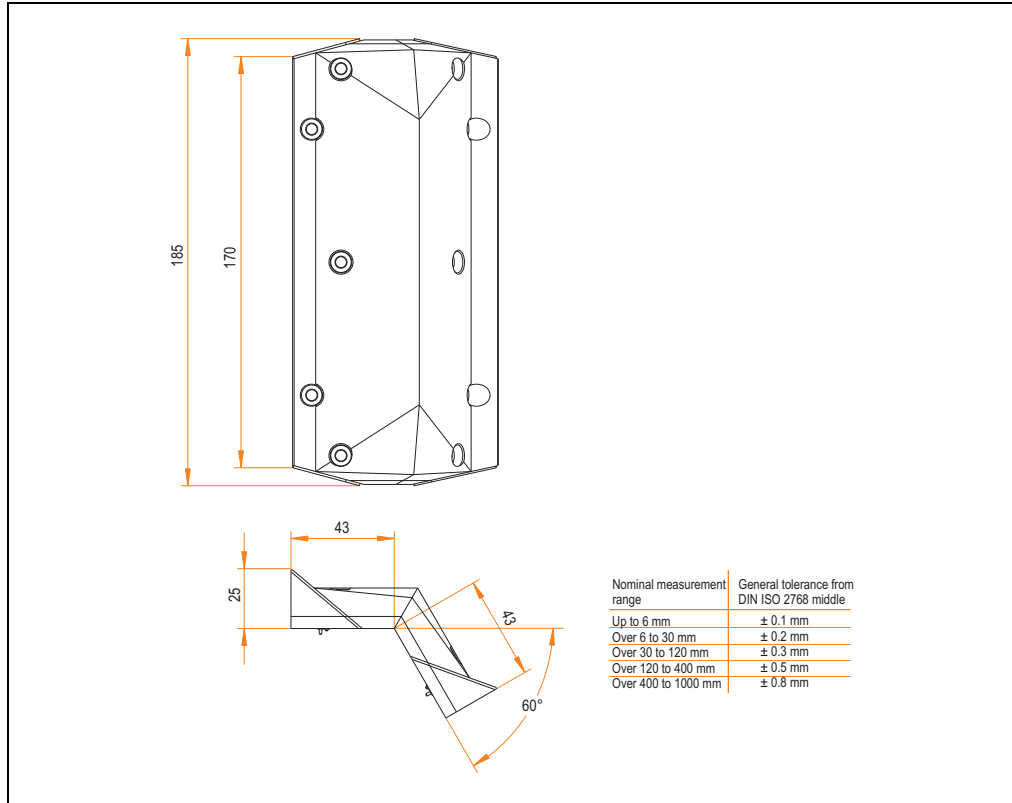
Dimensions - extension connector 60° 5AC800.CON2-00
